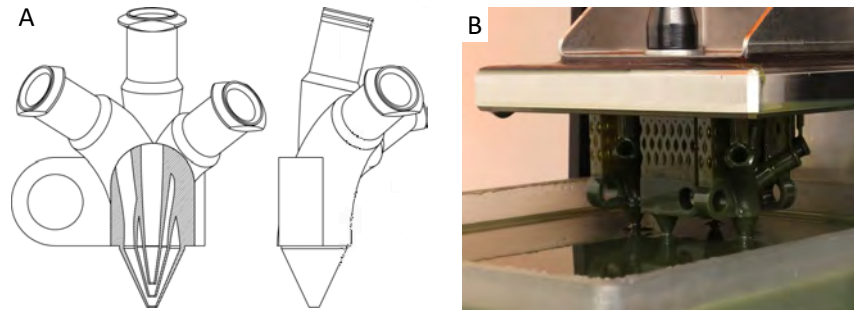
Schematic front and side views of the printhead design with a cut in the center (a). The dimensions of the outlets are $500\ \mu\text{m}$, $600\ \mu\text{m}$, and $800\ \mu\text{m}$ for the core, interfacial layer, and shell, respectively. (b) These printheads are fabricated using stereolithography (SLA) and an acrylic based HTM140 resin (EnvisionTEC, Dearborn, MI, USA).
